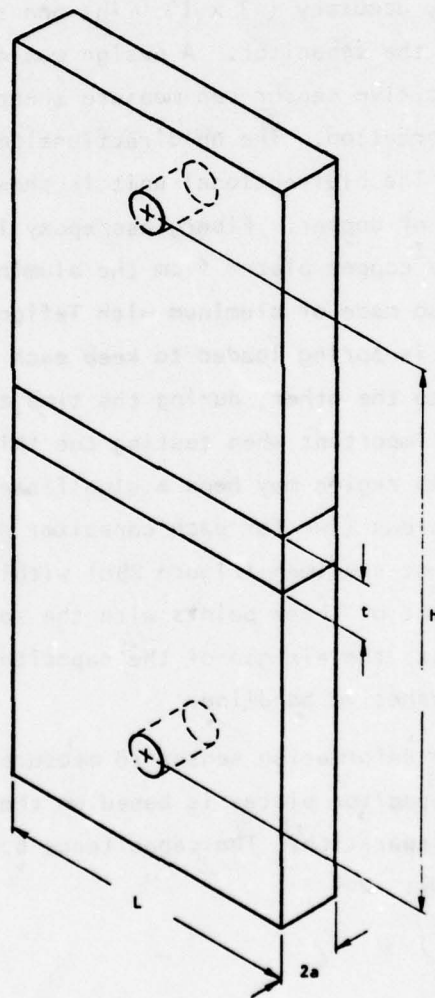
TYPICAL GEOMETRIC SHAPE AND PERTINENT DIMENSIONS OF OPTIMUM BUTT AND SCARF JOINT TEST SPECIMENS.
